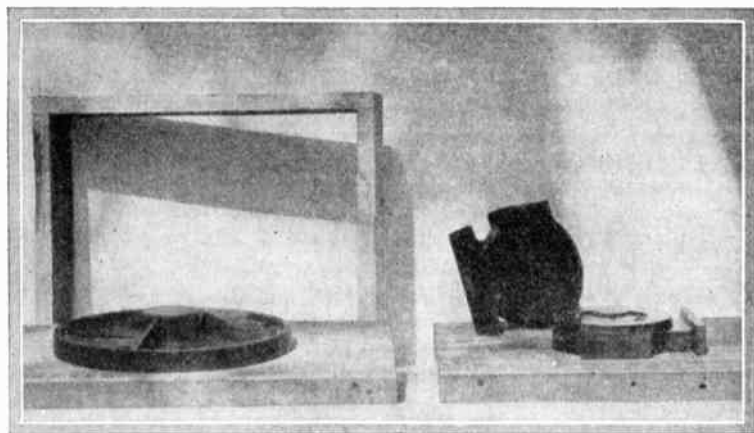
"A" (left) Pattern on moulding board. "B" (right) Two-piece pattern
